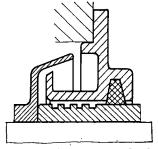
Combination seal: baffle plate, baffle thread, and felt-ring packing
